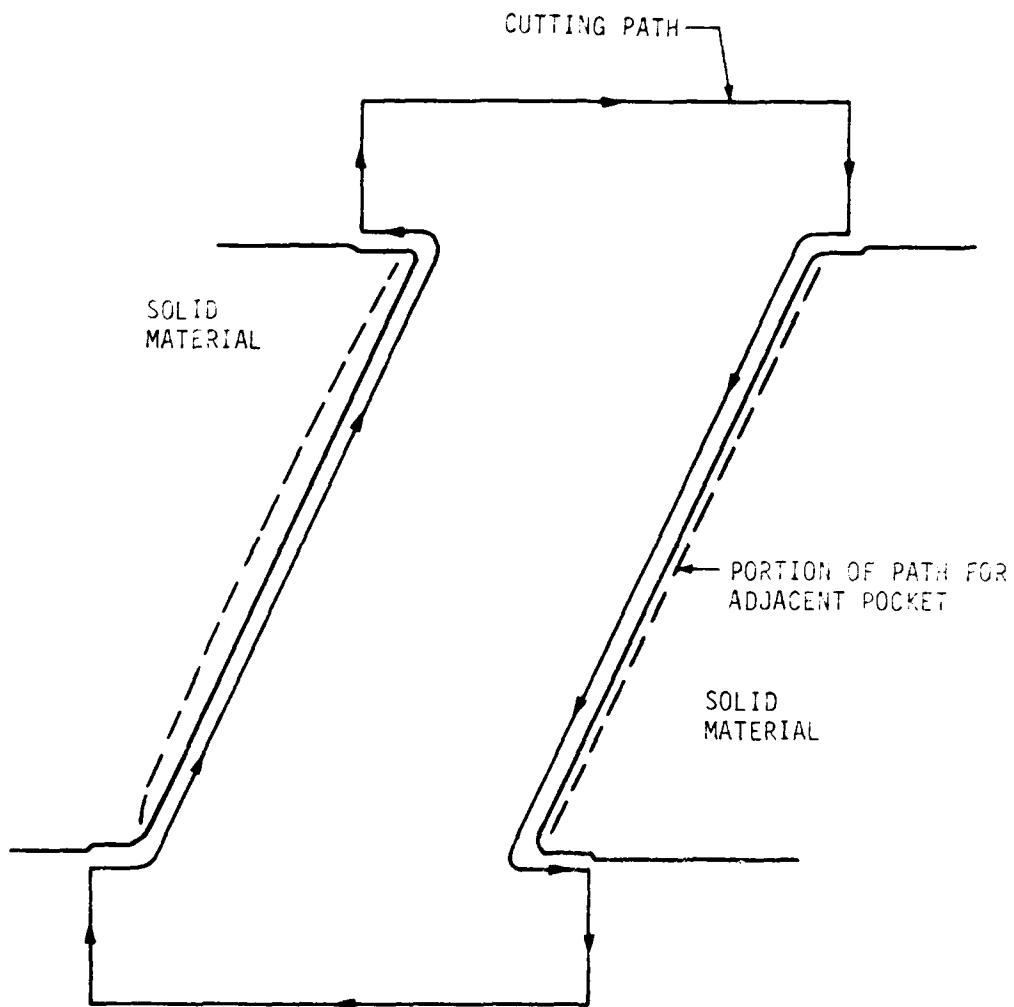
Cutting Path for Airfoil Rough and Finish Contour Milling.
